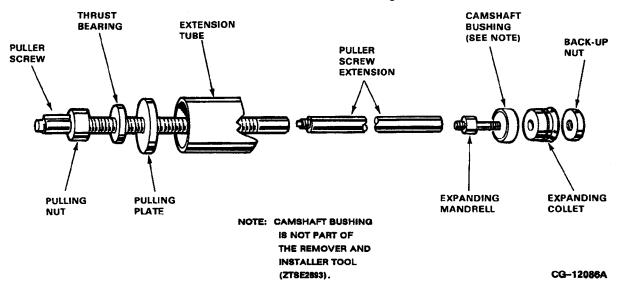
Camshaft Bushing Remover and Installer ZTSE-2893
